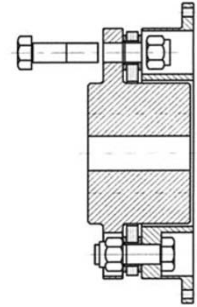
Disc pack assembly for short bolt configuration, series HBSX-RH
